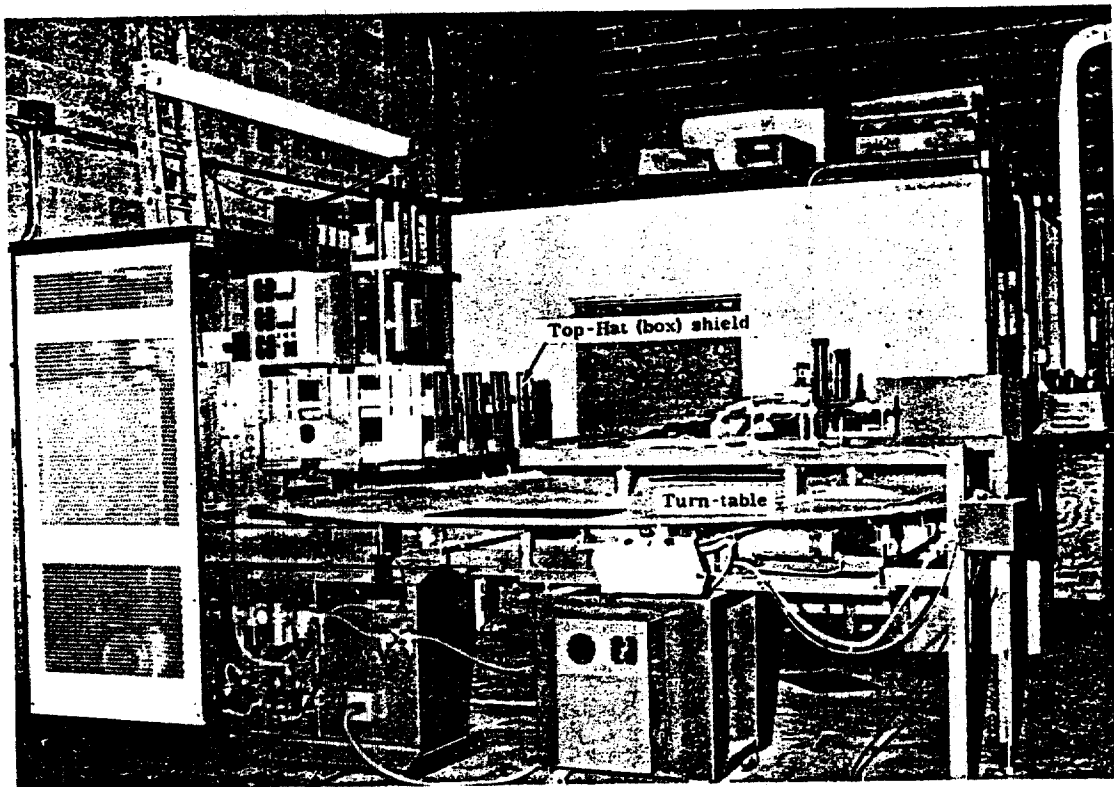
High Frequency Technology Co. and Hall Dielectric Machinery Co. 15 kW sealer incorporating turntable and top-hat (box) shield.
